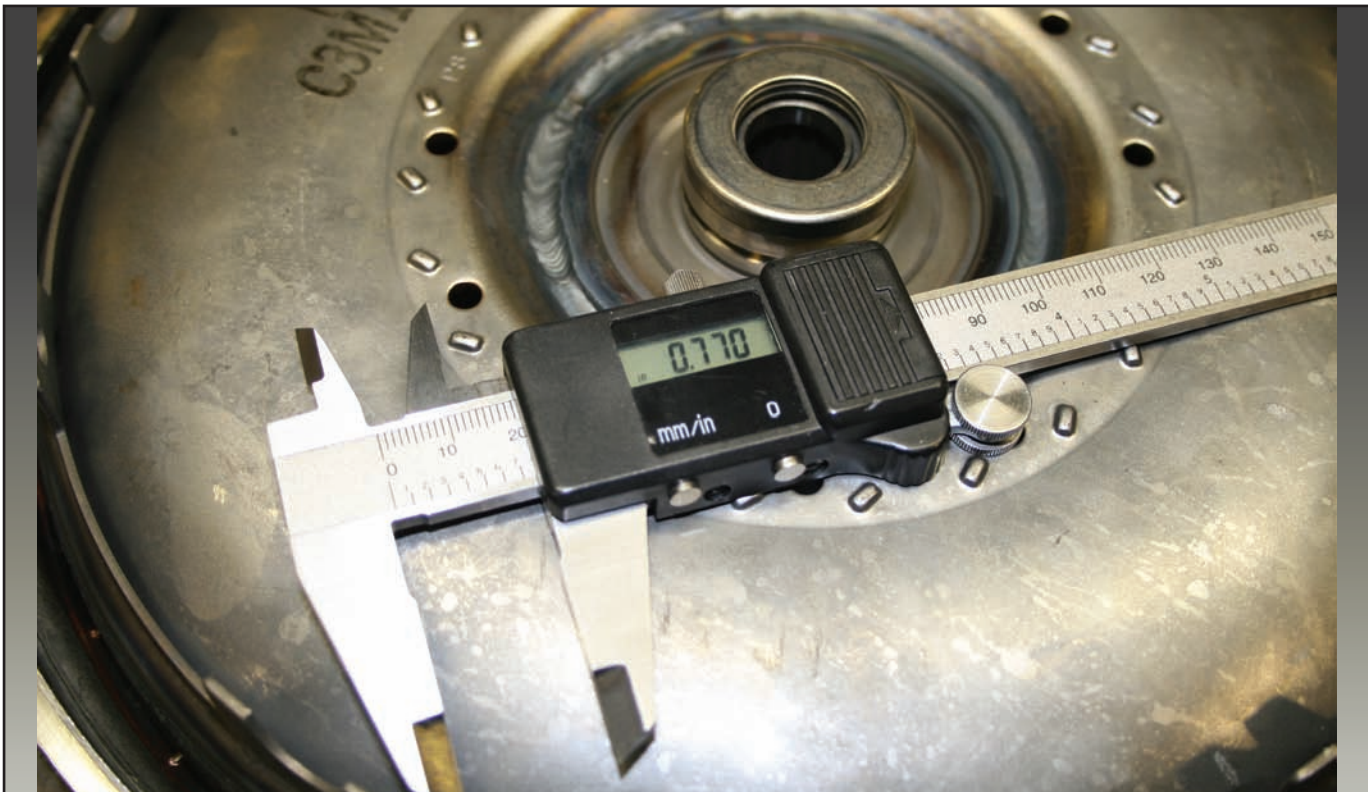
Your first step in checking converter clutch clearance is to measure the height from the clutch release stop on the turbine hub to the bearing surface.
